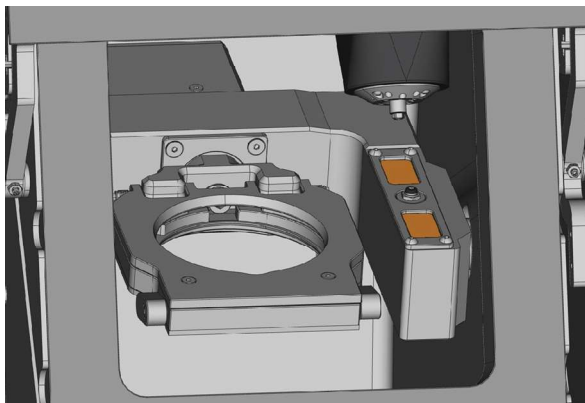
TOOL MAGAZINE IN THE WORKING CHAMBER (MARKED ORANGE)
